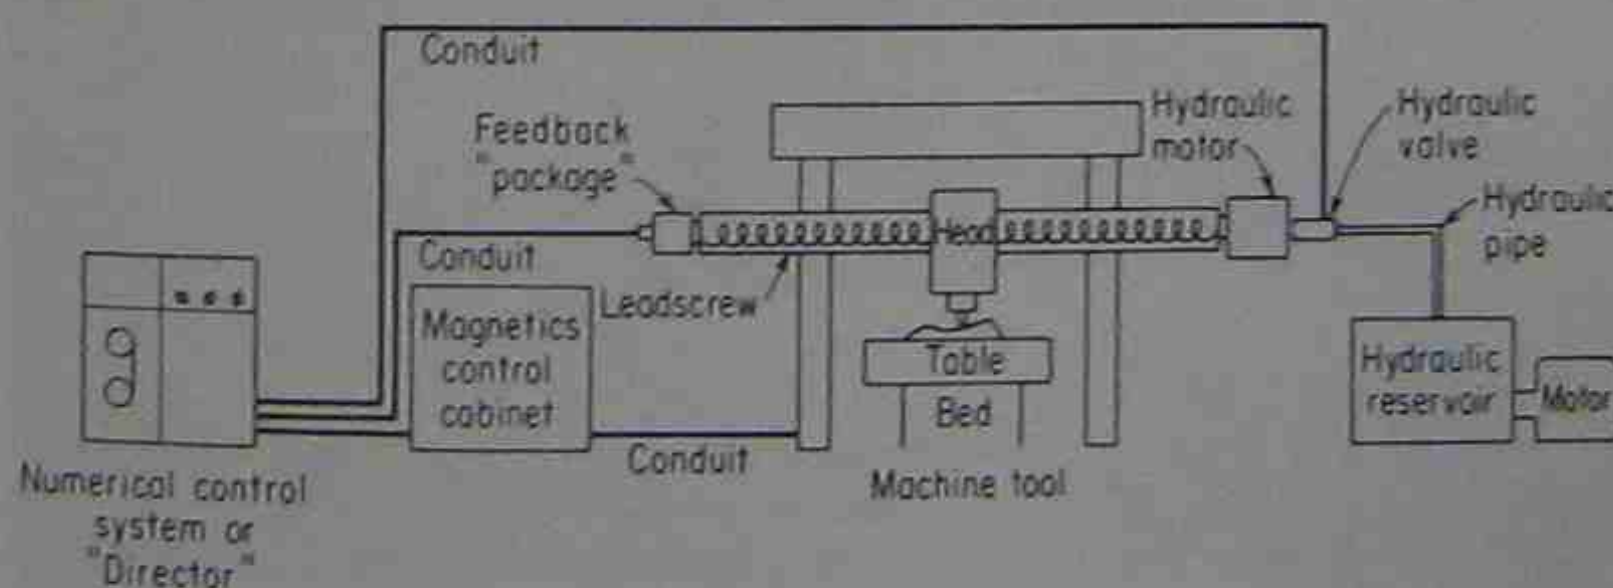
Major components comprising a numerical control machine tool installation. Although hydraulic units are shown in this example, electrical power drives are also utilized. Assuming this to be a 3-motion (3-axes) machine, the hydraulic motor, valve, and feedback "package" would be duplicated for the vertical motion of the head and table motions.
